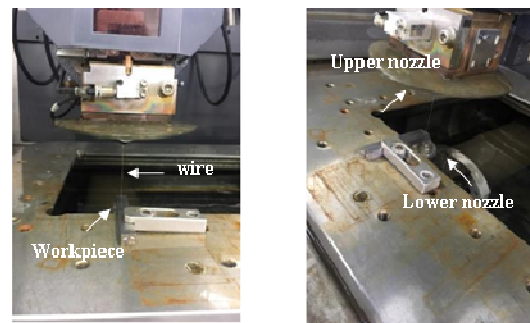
show experimental set up. The thickness of work piece is 2.0 mm. The experiments were carried out by the maincut and trim cut using three parameters; voltage open(Vo), peak current (Ip) and wire speed (Ws). The research was investigated by material removal rate(MRR) ( $\text{mm}^3/\text{min}$ ), surface roughness(SR) and surface crack density (SCD).
